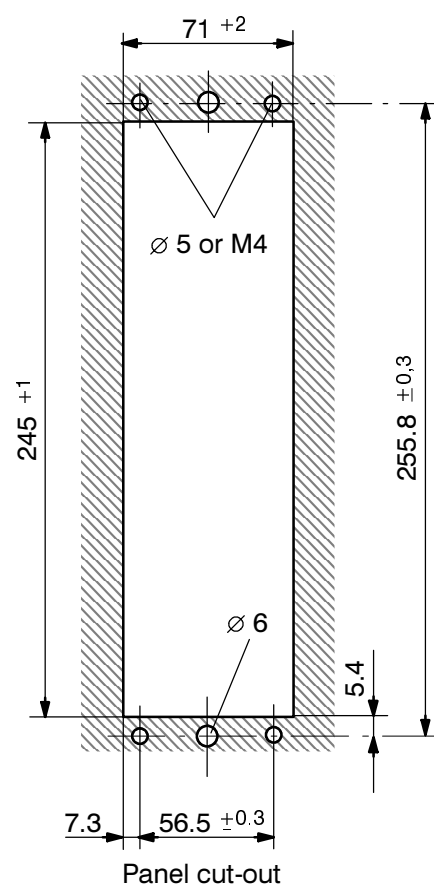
Dimensions for housing 7XP20 for panel flush mounting or cubicle installation
